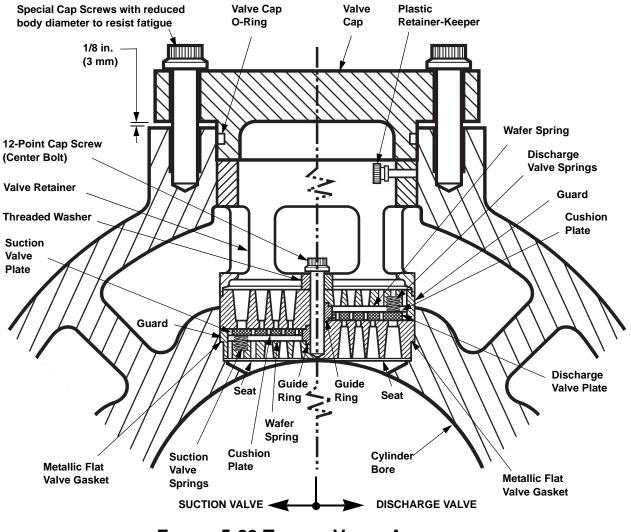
TYPICAL VALVE ASSEMBLIES
